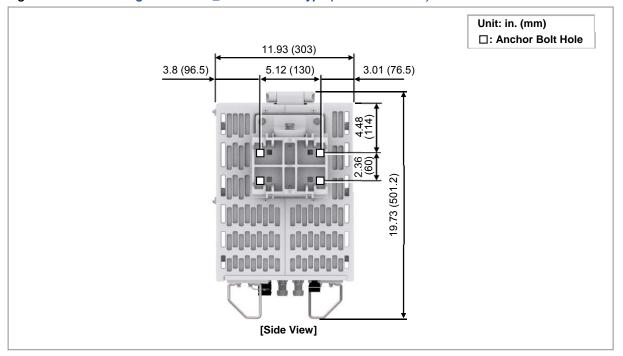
RRH marking dimensions\_3 Sector Wall Type (Standard Installation)
